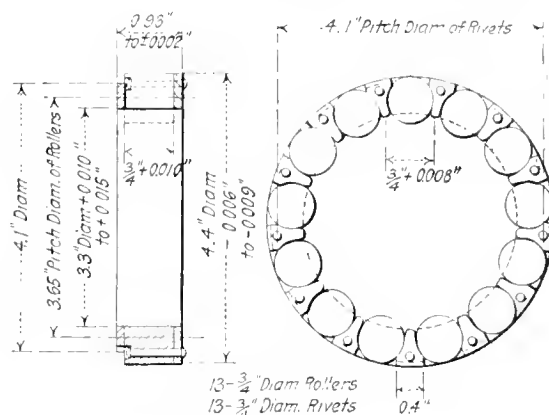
LOCATED CAGE FOR ROLLER BEARINGS
